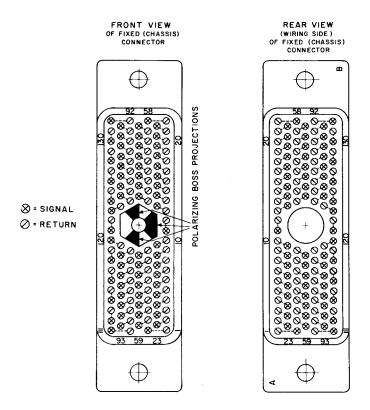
Contact Arrangement for Preferred 132 Pin Auxiliary Connector
